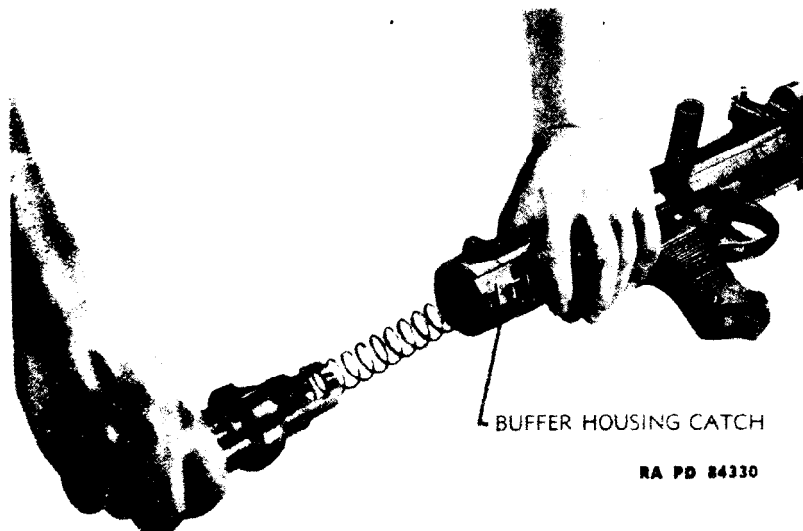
German 7.9-mm Dual Purpose Machine Gun MG34 —
